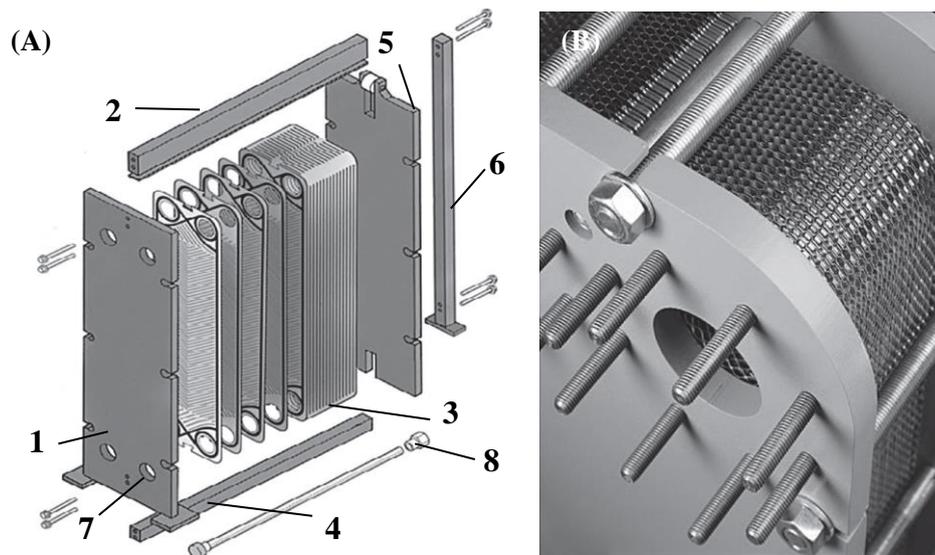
(A) Construction of a plate heat exchanger (1 – fixed frame plate; 2 – top carrying bar; 3 – plate pack; 4 – bottom carrying bar; 5 – movable pressure plate; 6 – support column; 7 – fluid port; 8 – tightening bolts) and (B) closer view of assembled plates. (Thulukkanam, 2013).
